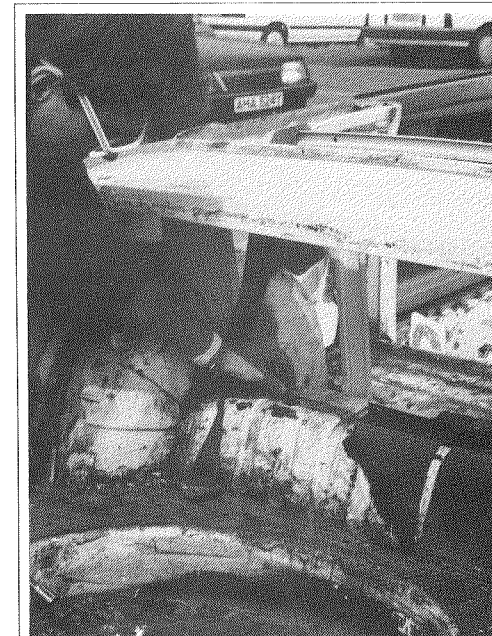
Follow this by removing the seat belt ring bolt mountings close to the handbrake lever, then spring tunnel...
